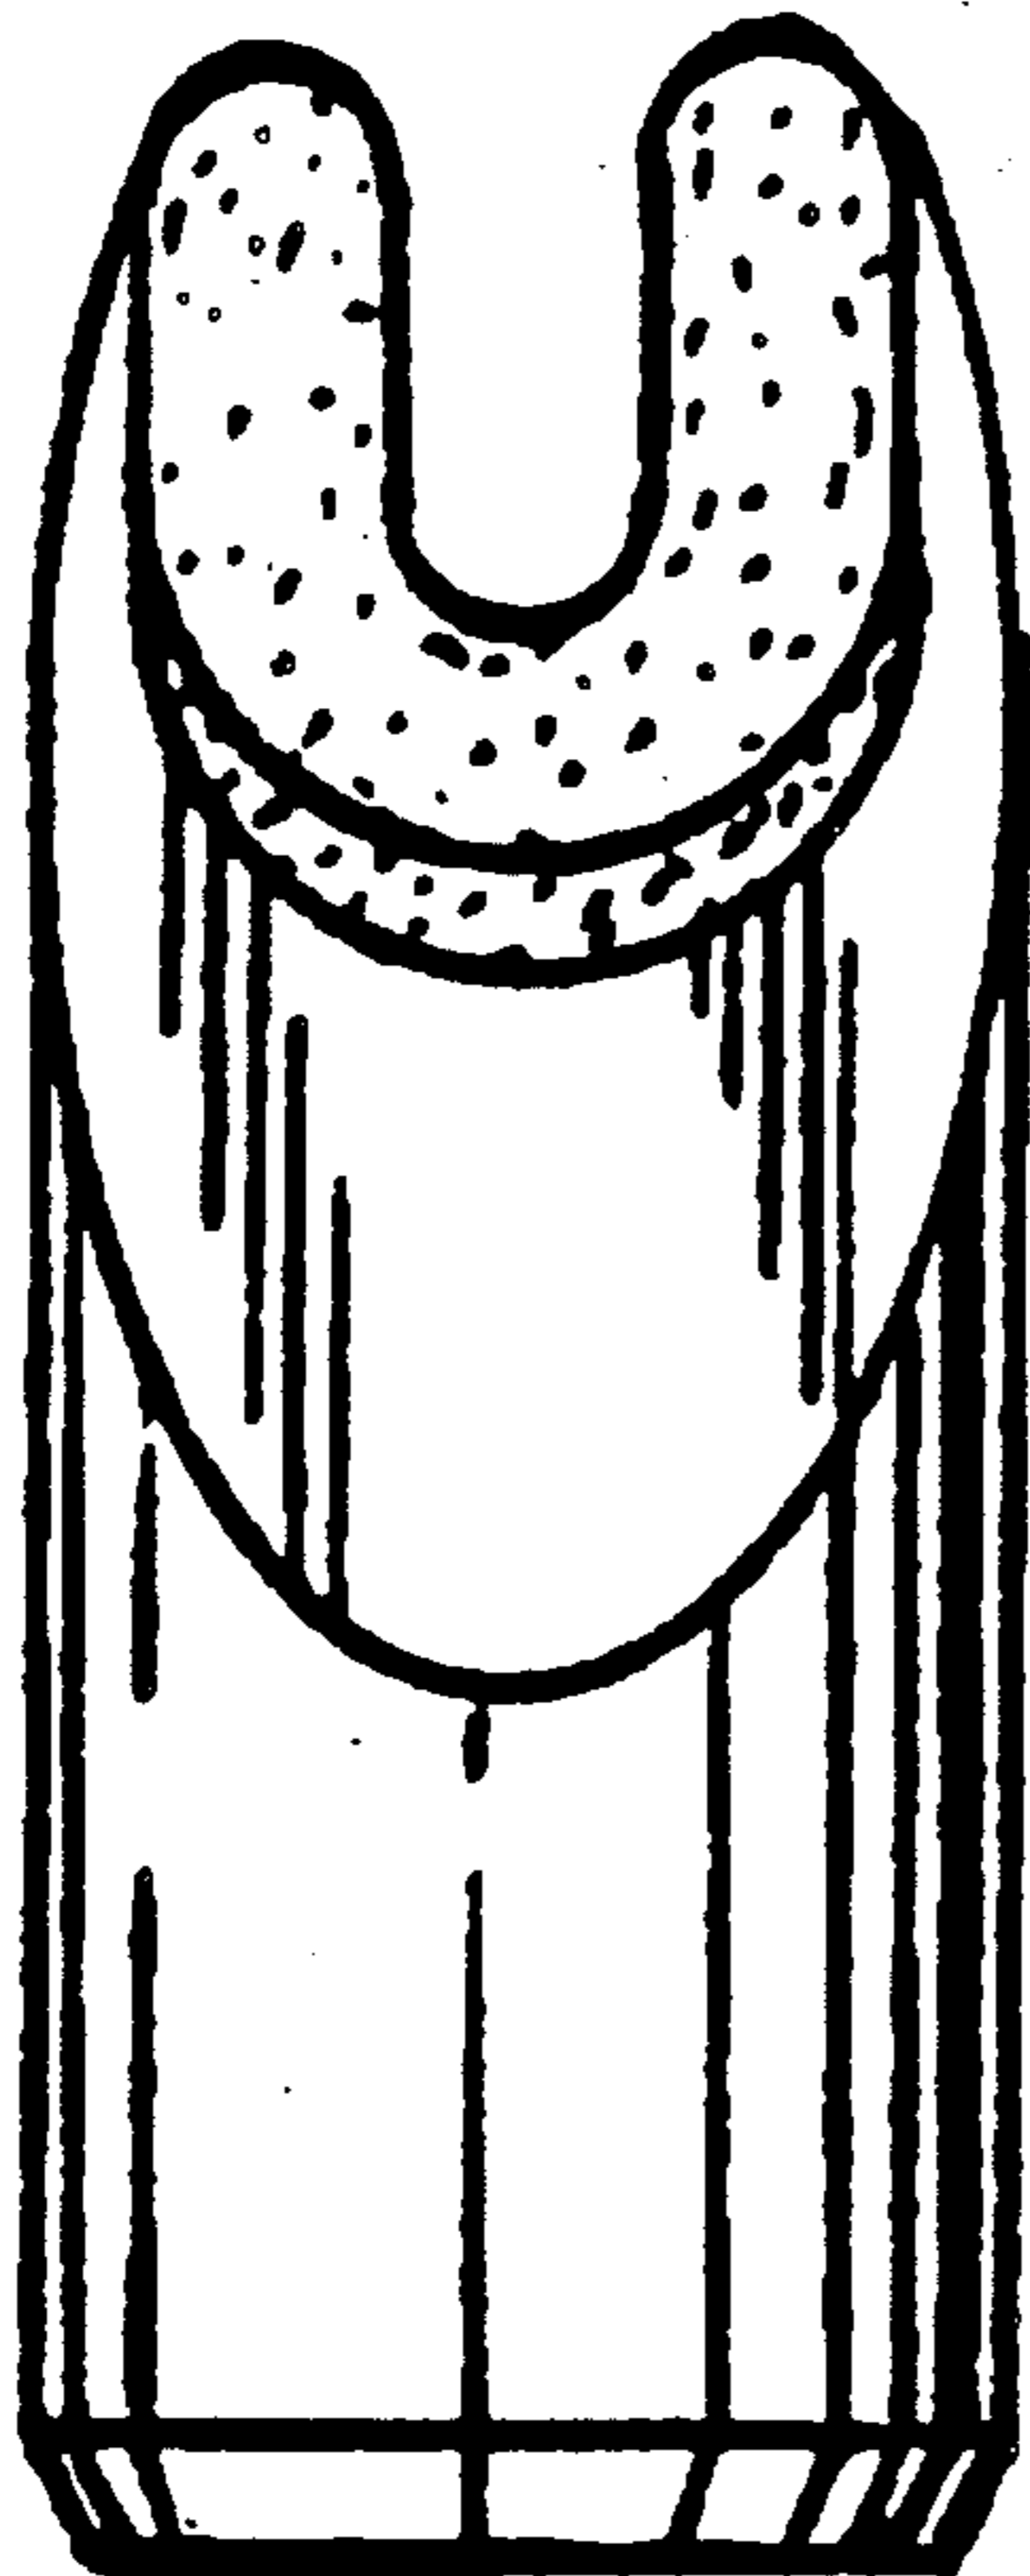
is a front elevational view of a stud-mounted polycrystalline diamond cutting blank showing my new design;
